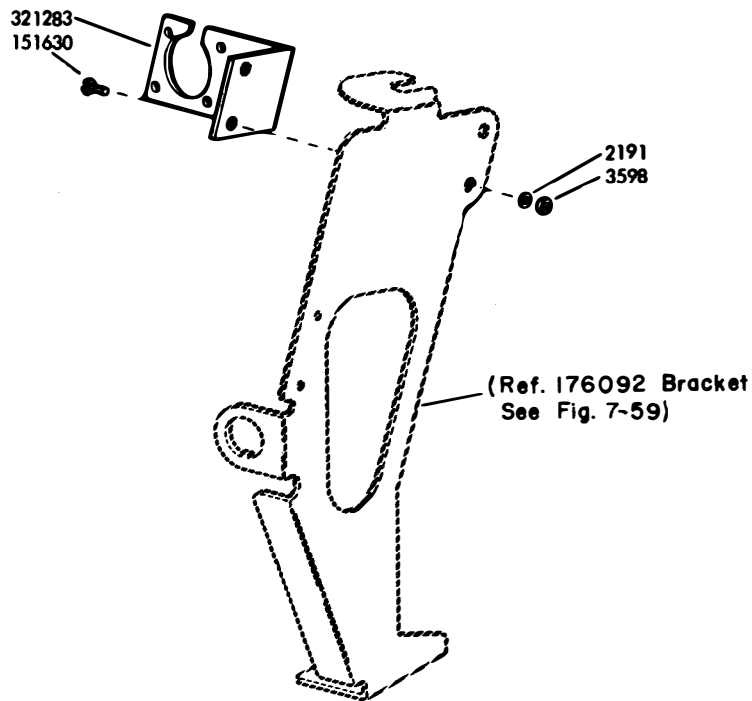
Cable Mounting Components for Compact Typing Reperforator - Used on Low-Level Sets
